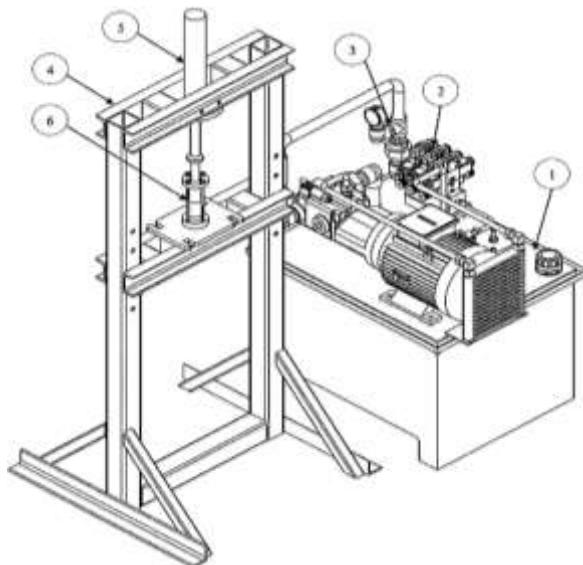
The laboratory hydraulic press fabricated for pellet production: 1- Power pack, 2- Flow control valve, 3- Pressure control valve, 4- Platform, 5- Hydraulic jack and 6- Die.
